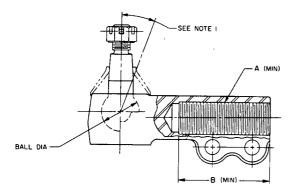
TYPICAL BALL STUD SOCKET ASSEMBLY WITH INTERNAL THREADED STEM
